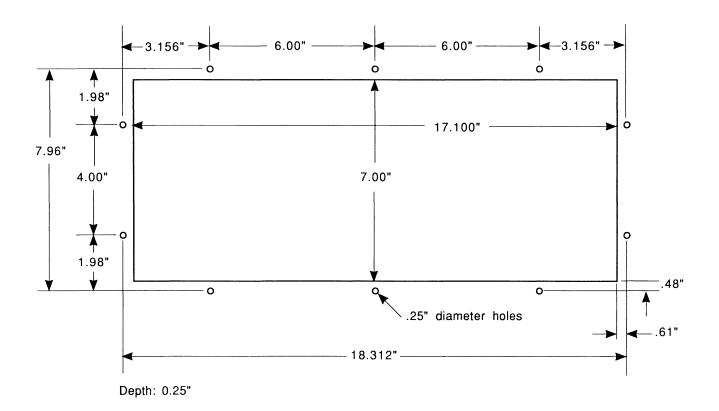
8000-KB3 and 8000-KB4 Keyboard Cutout Dimensions
